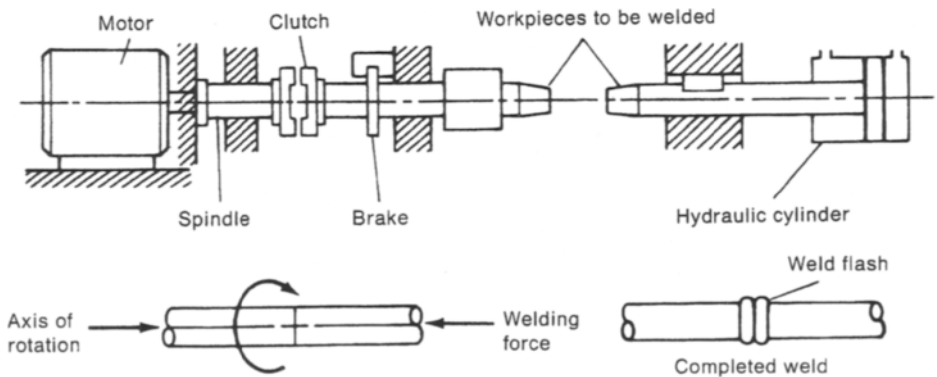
Friction welding: top diagram shows general equipment arrangement, bottom diagram shows the relative movement and geometry of joint.
